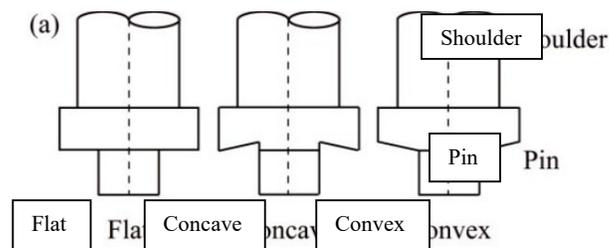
Different tool shoulder profiles, reproduced from review on underwater friction stir welding: A variant of friction stir welding with great potential of improving joint properties, [27].
